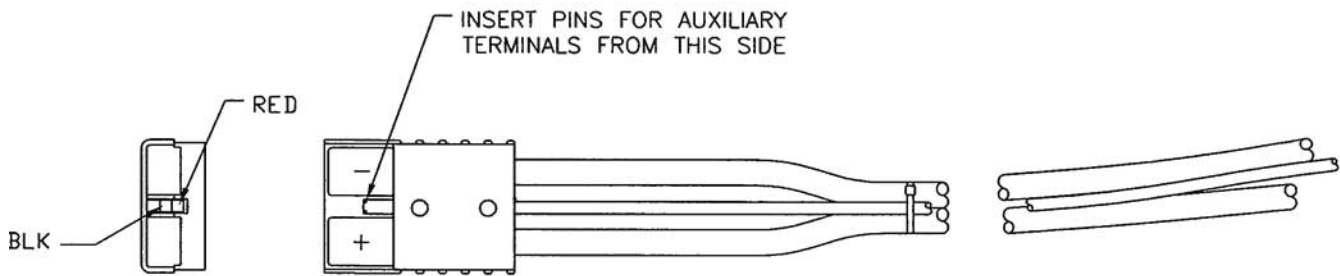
Battery Cable with SBX Auxiliary Contact Cable Harness
